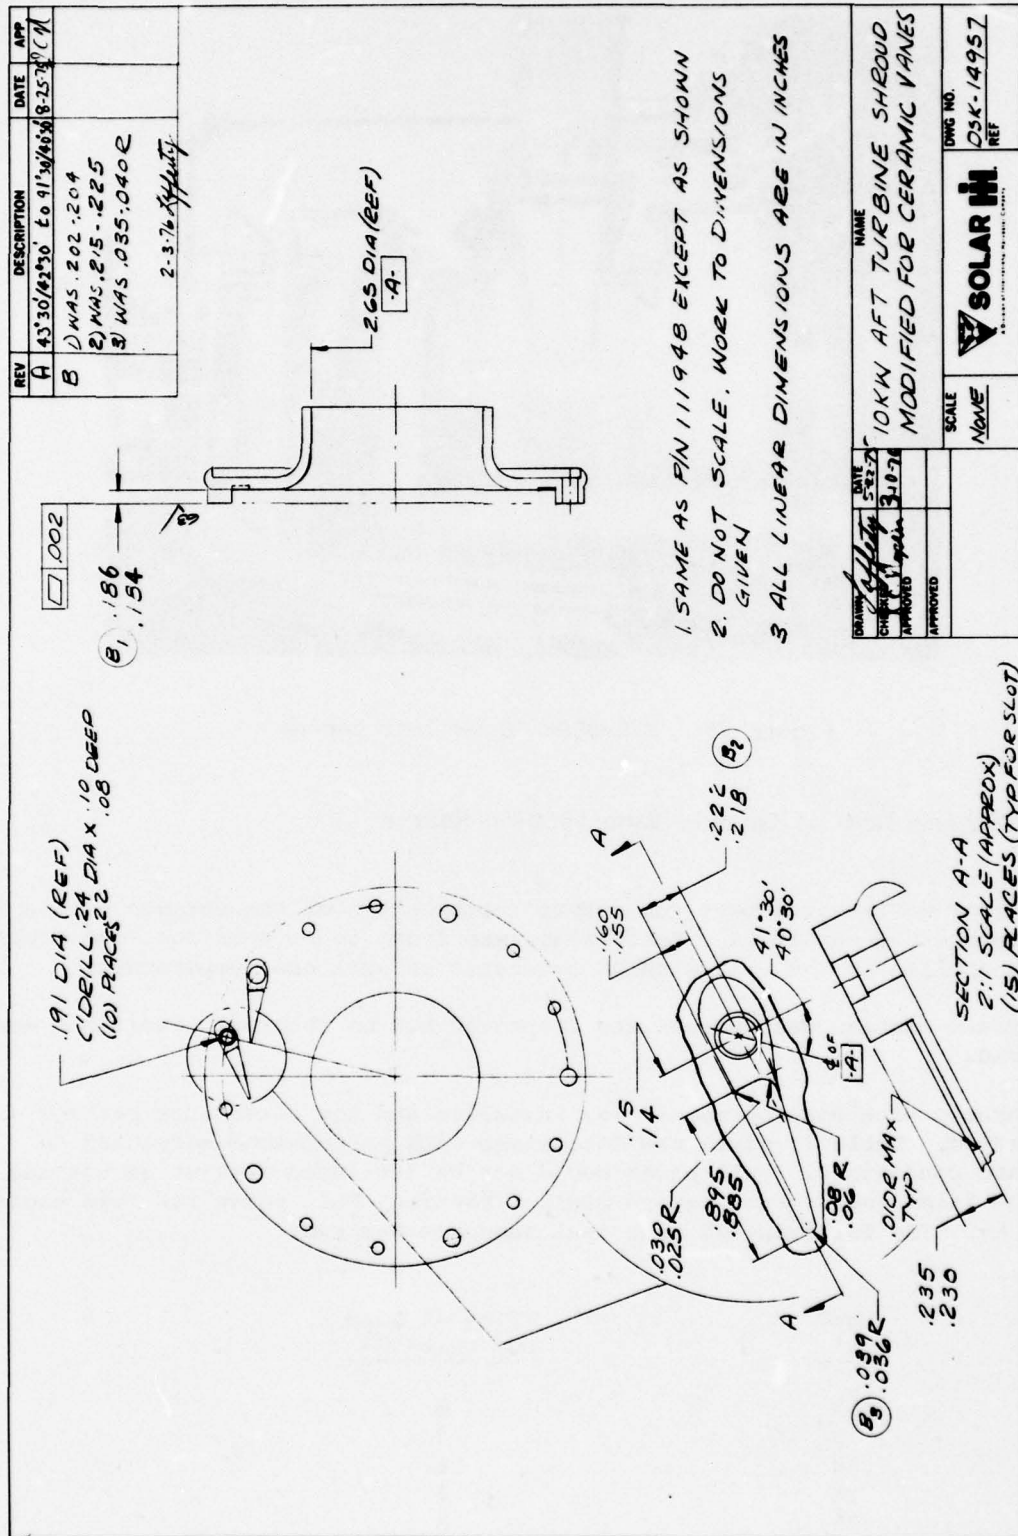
Rear Shroud for Engine Test of Ceramic Vanes
